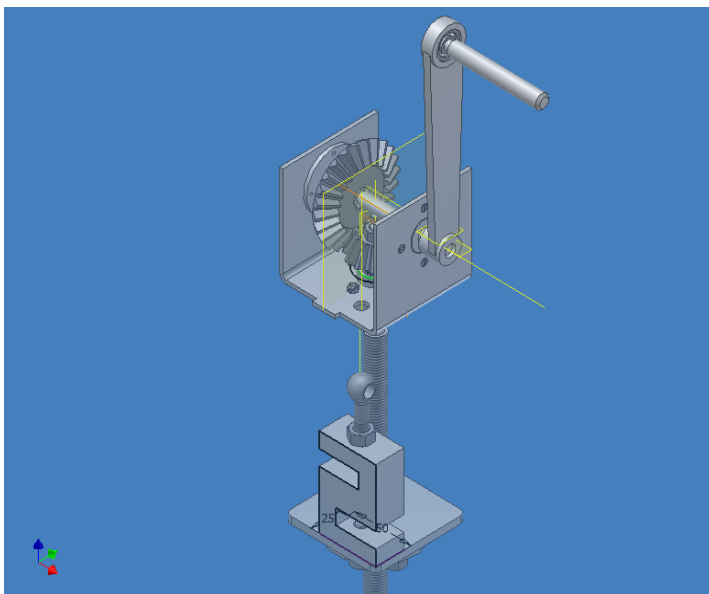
Detail drawing of the designed Gearbox and rotating liver
